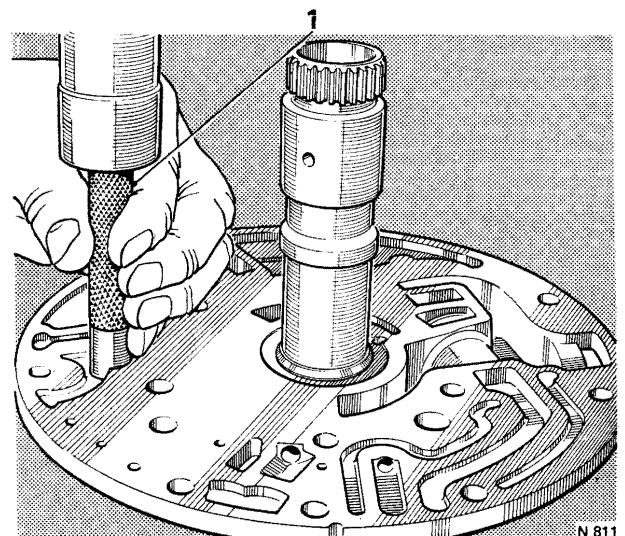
FITTING THE BY-PASS VALVE SEAT
